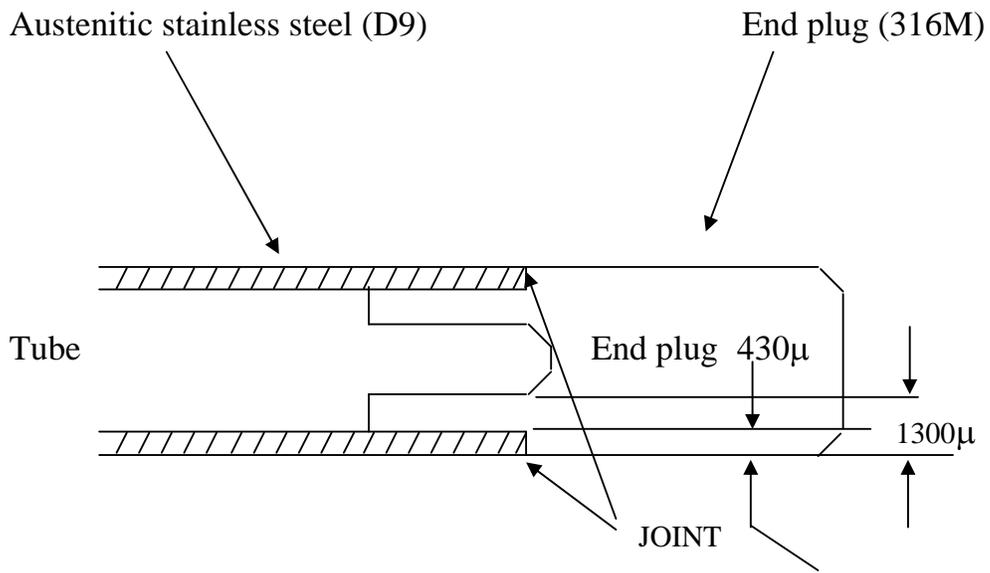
Weld Joint Showing Fuel tube and End plug
